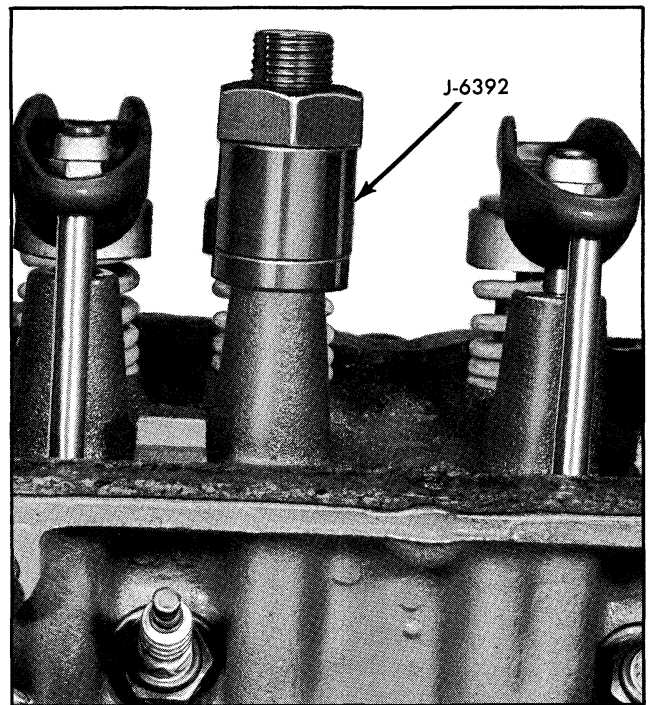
Tool Installation for Removing Rocker Arm Stud
